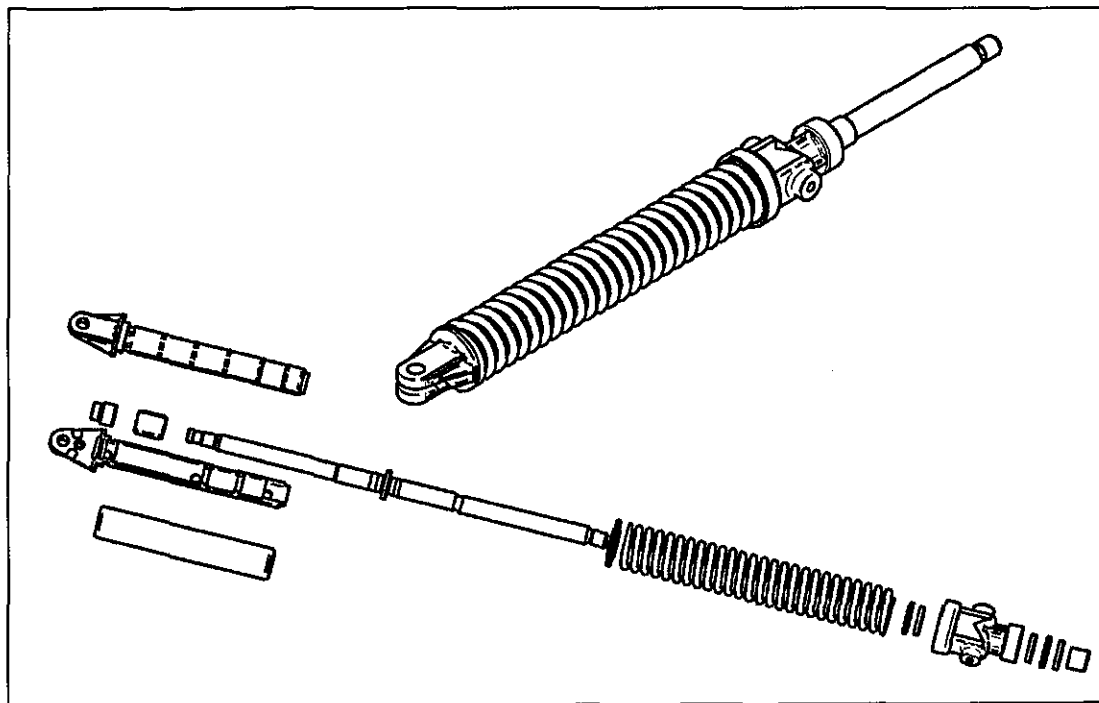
Exploded view of seat height adjuster (Heat shrink Sleeve not included)
